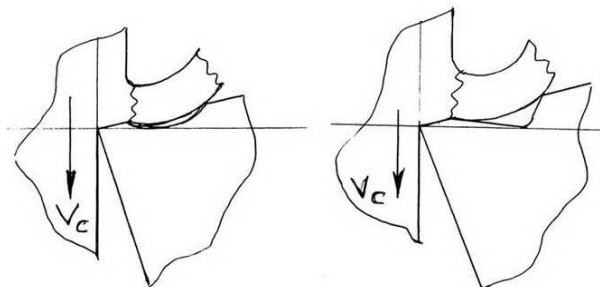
Step type in-built chip breaker (a) Parallel step
